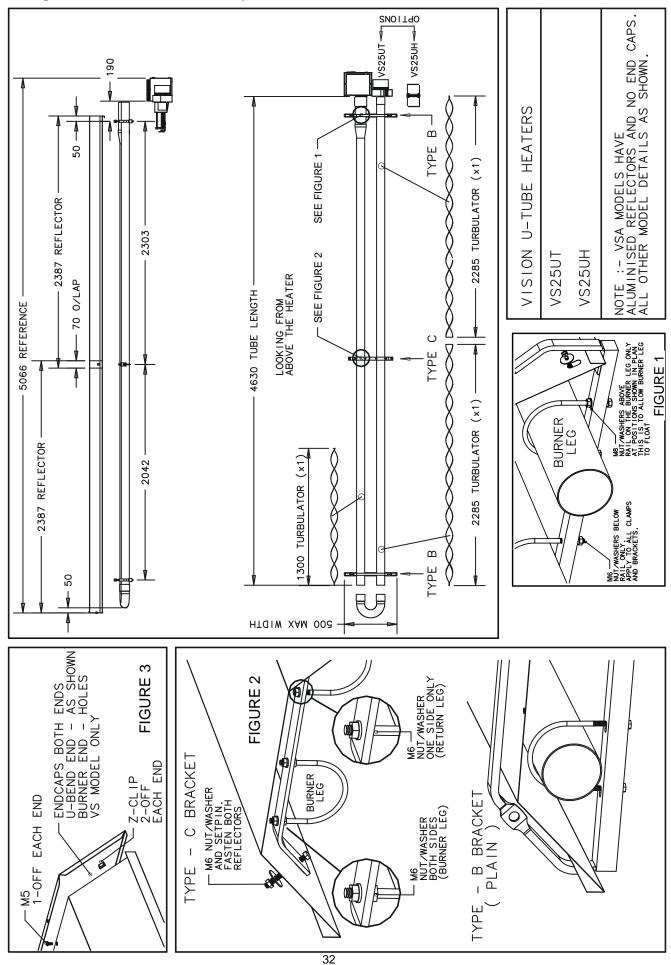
Vision Heater Assembly: Models VS/VSA U tube 30kW.
